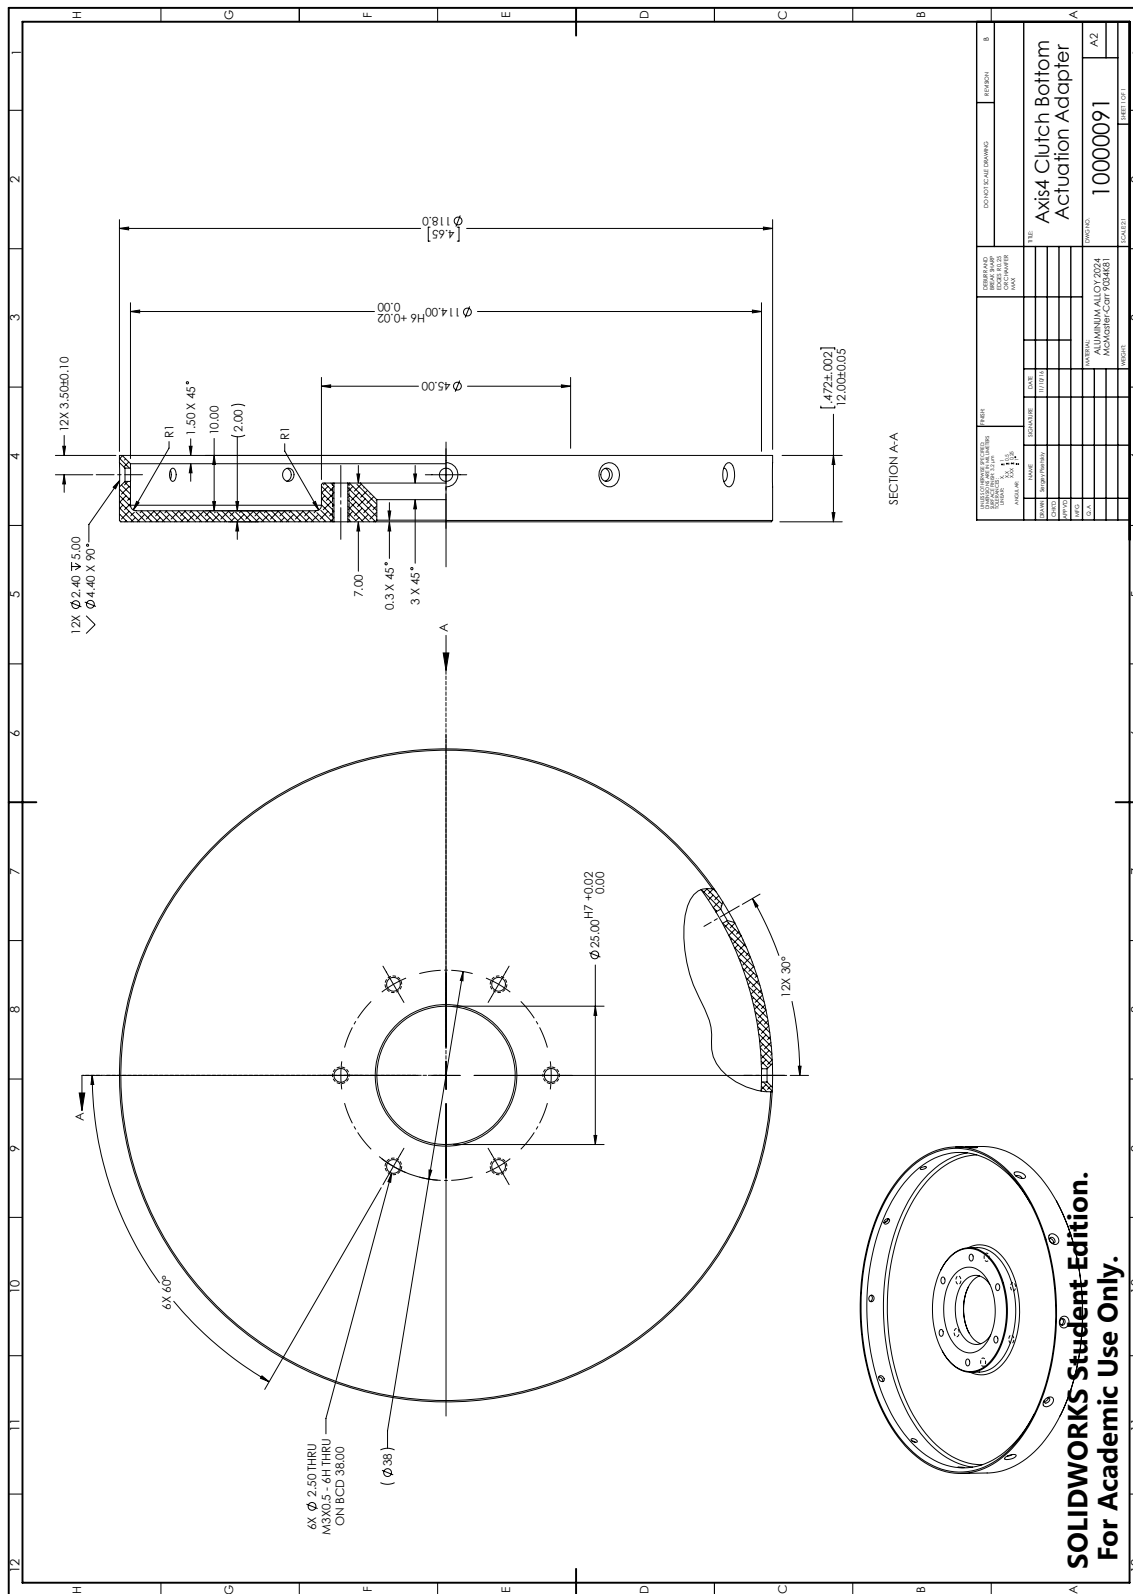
Drawing: Join 4 clutch pair bottom actuation adapter.
